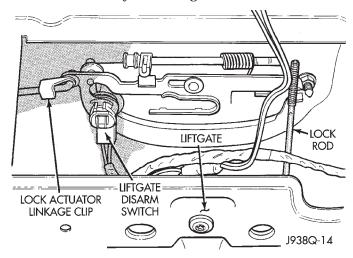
Liftgate Lock Cylinder Switch Remove/Install
